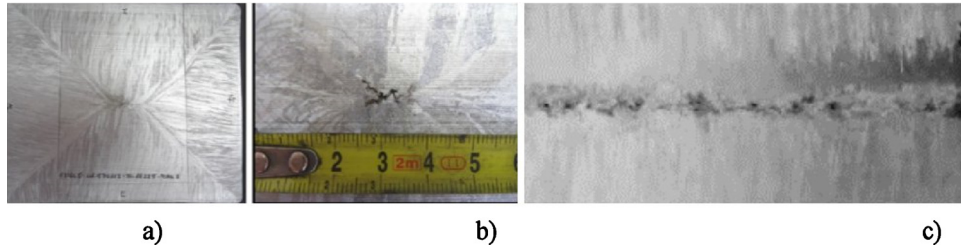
a) Transversal section of an AISI 316L billet. b) Detail of the central transversal section defect. c) Longitudinal section.
